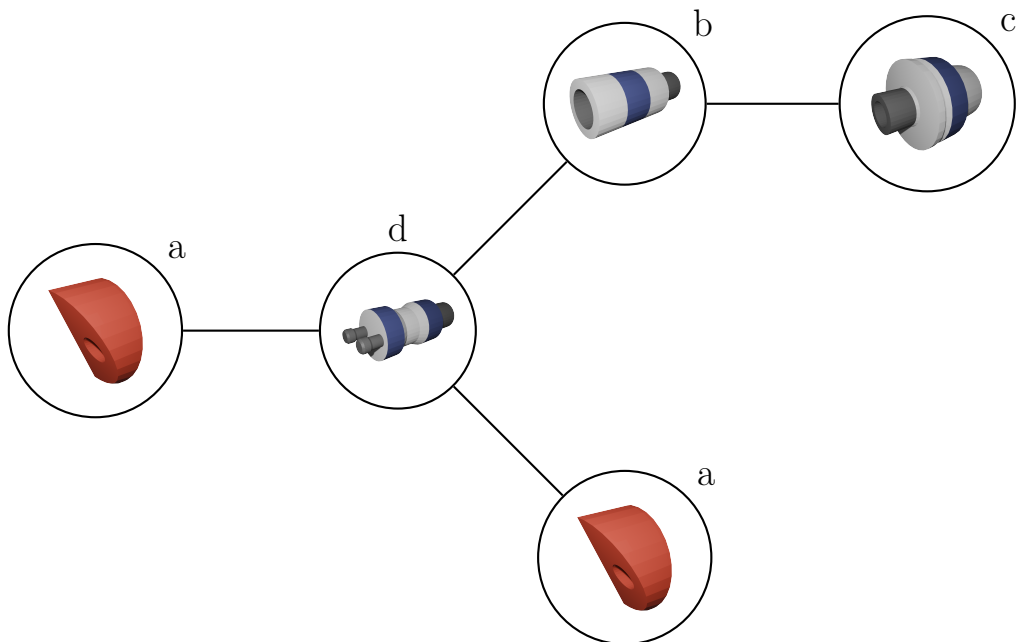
Exemplary assembly of an attachment to robots for machining. The assembly consists of five parts of four different part types $\mathcal{T} = \{a, b, c, d\}$, i.e., it contains two part instances of type *a*. The representation of the assembly as an undirected graph is shown below, with the respective part type annotated at the part node. Part *c* is a basic holder that is connected to a boring tool (*d*) via an extension (*b*). Two insert holders (*a*) are further attached to the boring tool. They can be fitted with cutting inserts for milling which are not part of this assembly.
